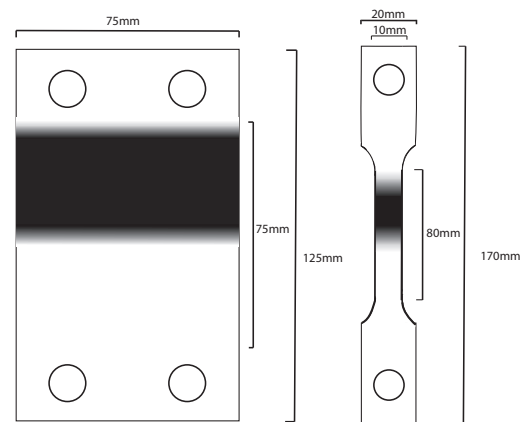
The dimensions of a fracture specimen and a tensile specimen
